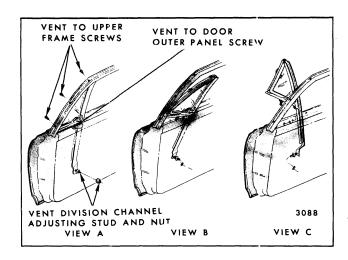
Front Door Ventilator Removal - "X-69" Styles with Ventilator Option
